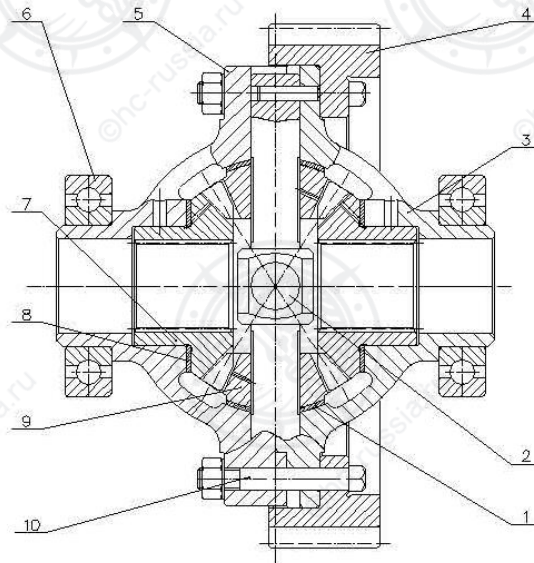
1.0t-1.8t Differential assembly structure drawing
